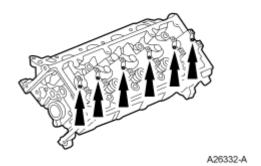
Bearing Caps & Camshaft Courtesy of FORD MOTOR CO.
